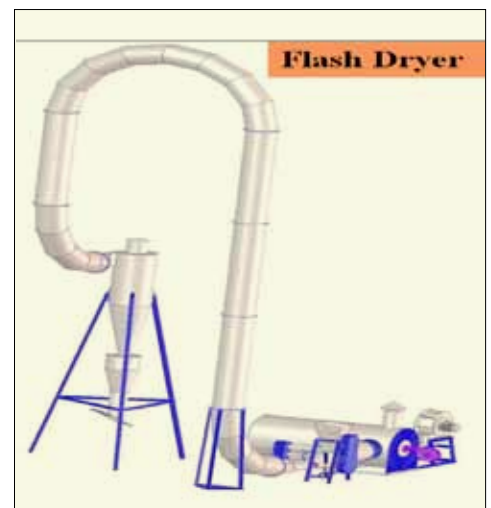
Equipment fabricators and samples of their cassava processing machines.
